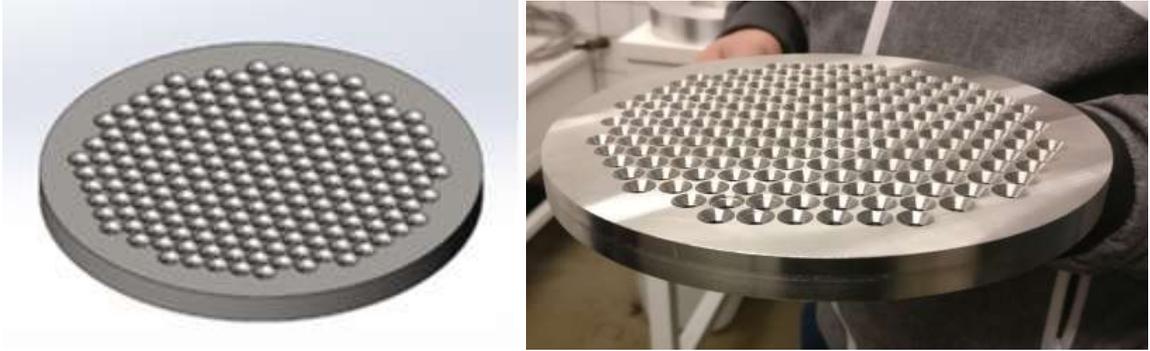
Filter plate as Solidworks® model (left) and as a manufactured part (right).
